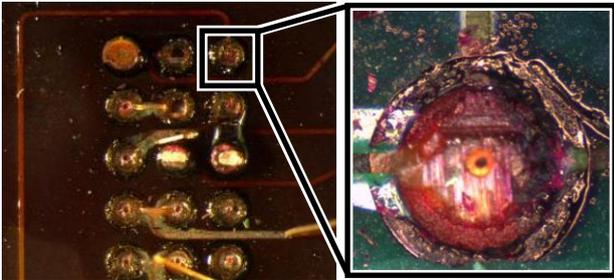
Failure analysis of package type VFBGA-90. The failure of the daisy chain is caused by a broken copper trace connection to a PCB pad.
